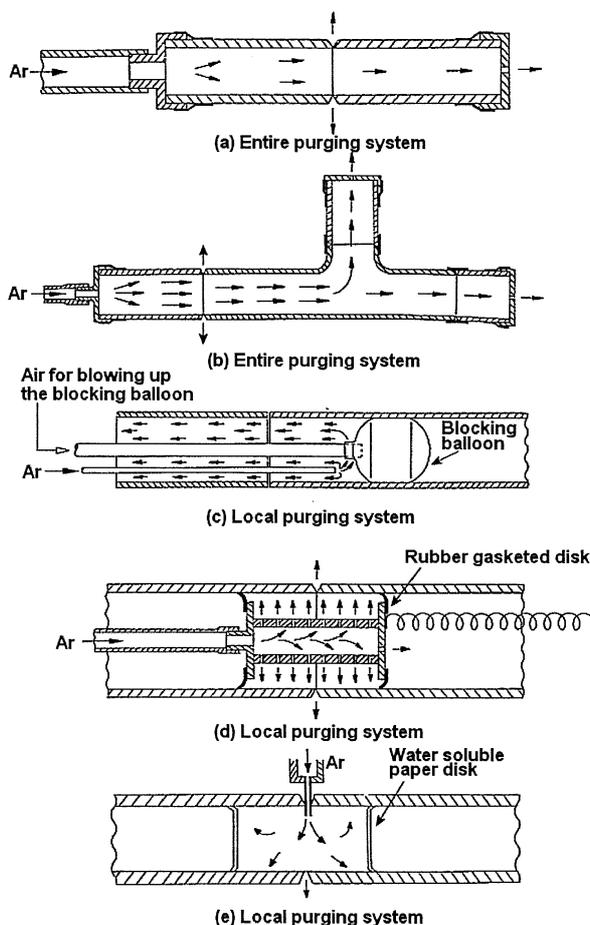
Typical gas purging systems for back shielding the root pass weld in piping
